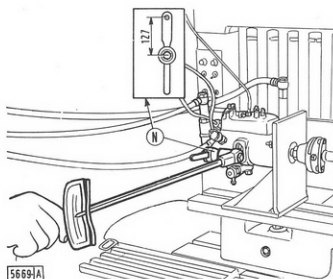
Tightening the Maximum Fuel Adjusting Plate Retaining Screws
